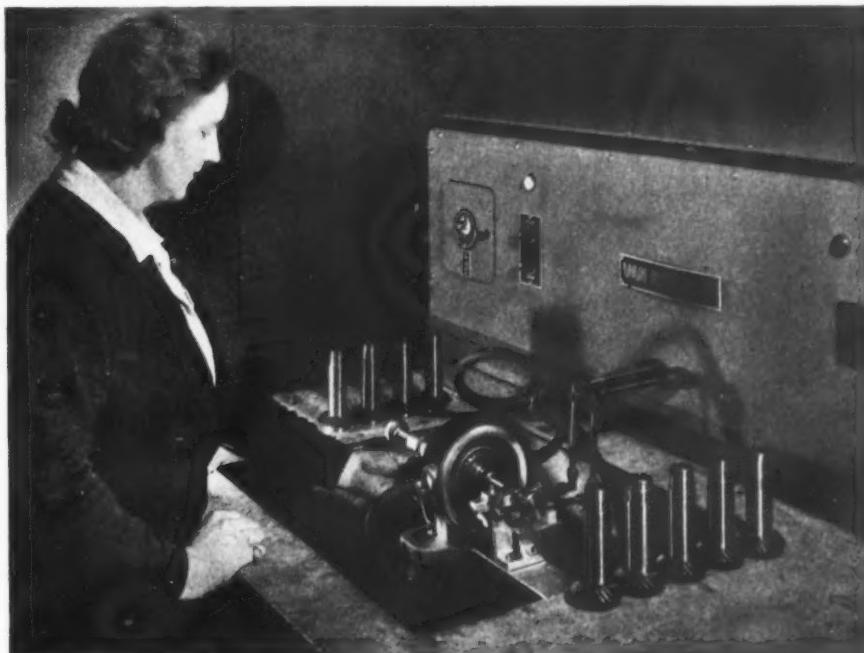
Fixture Used for Hardening the Gear Shown in Fig. 6
